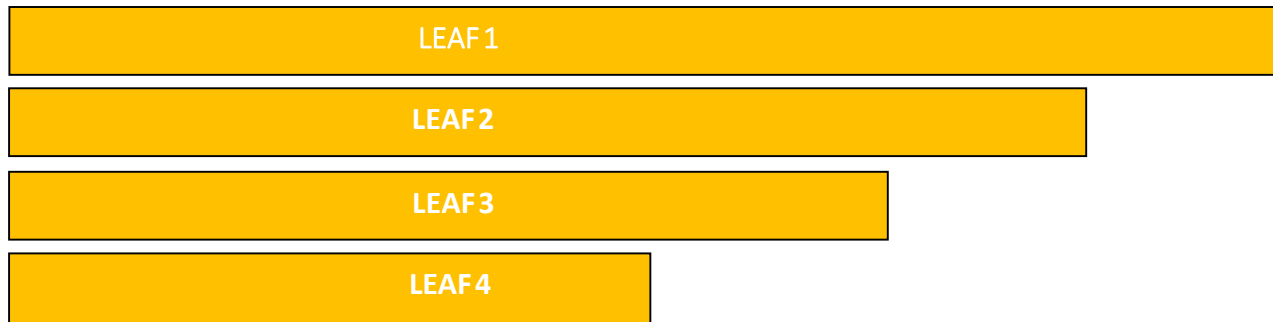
Half cross-section of the current Structural Steel leaf spring
